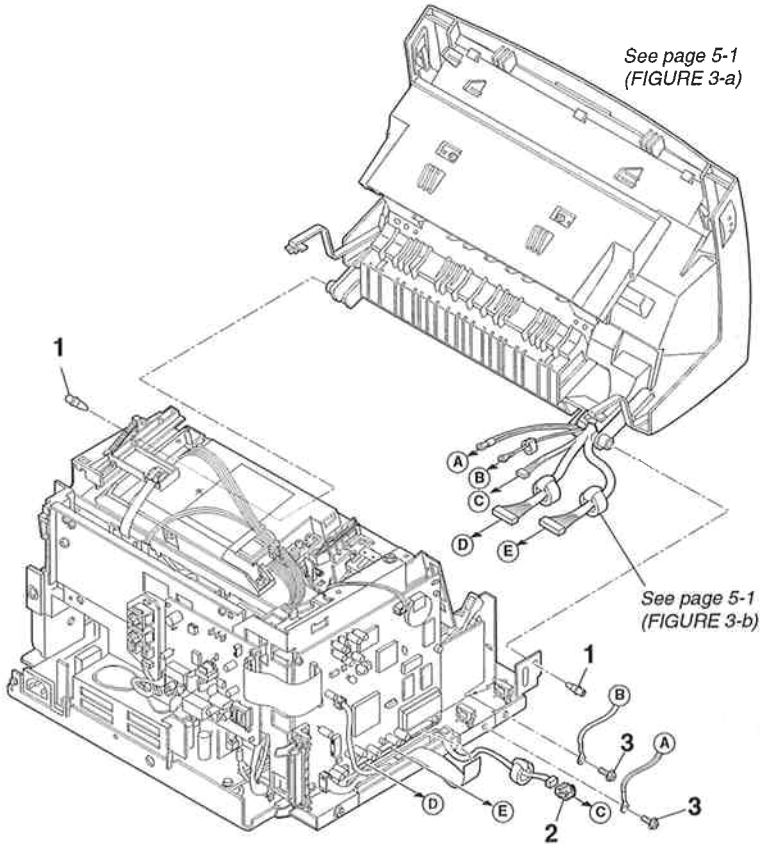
CIRCUIT BOARDS & MAIN FRAME
